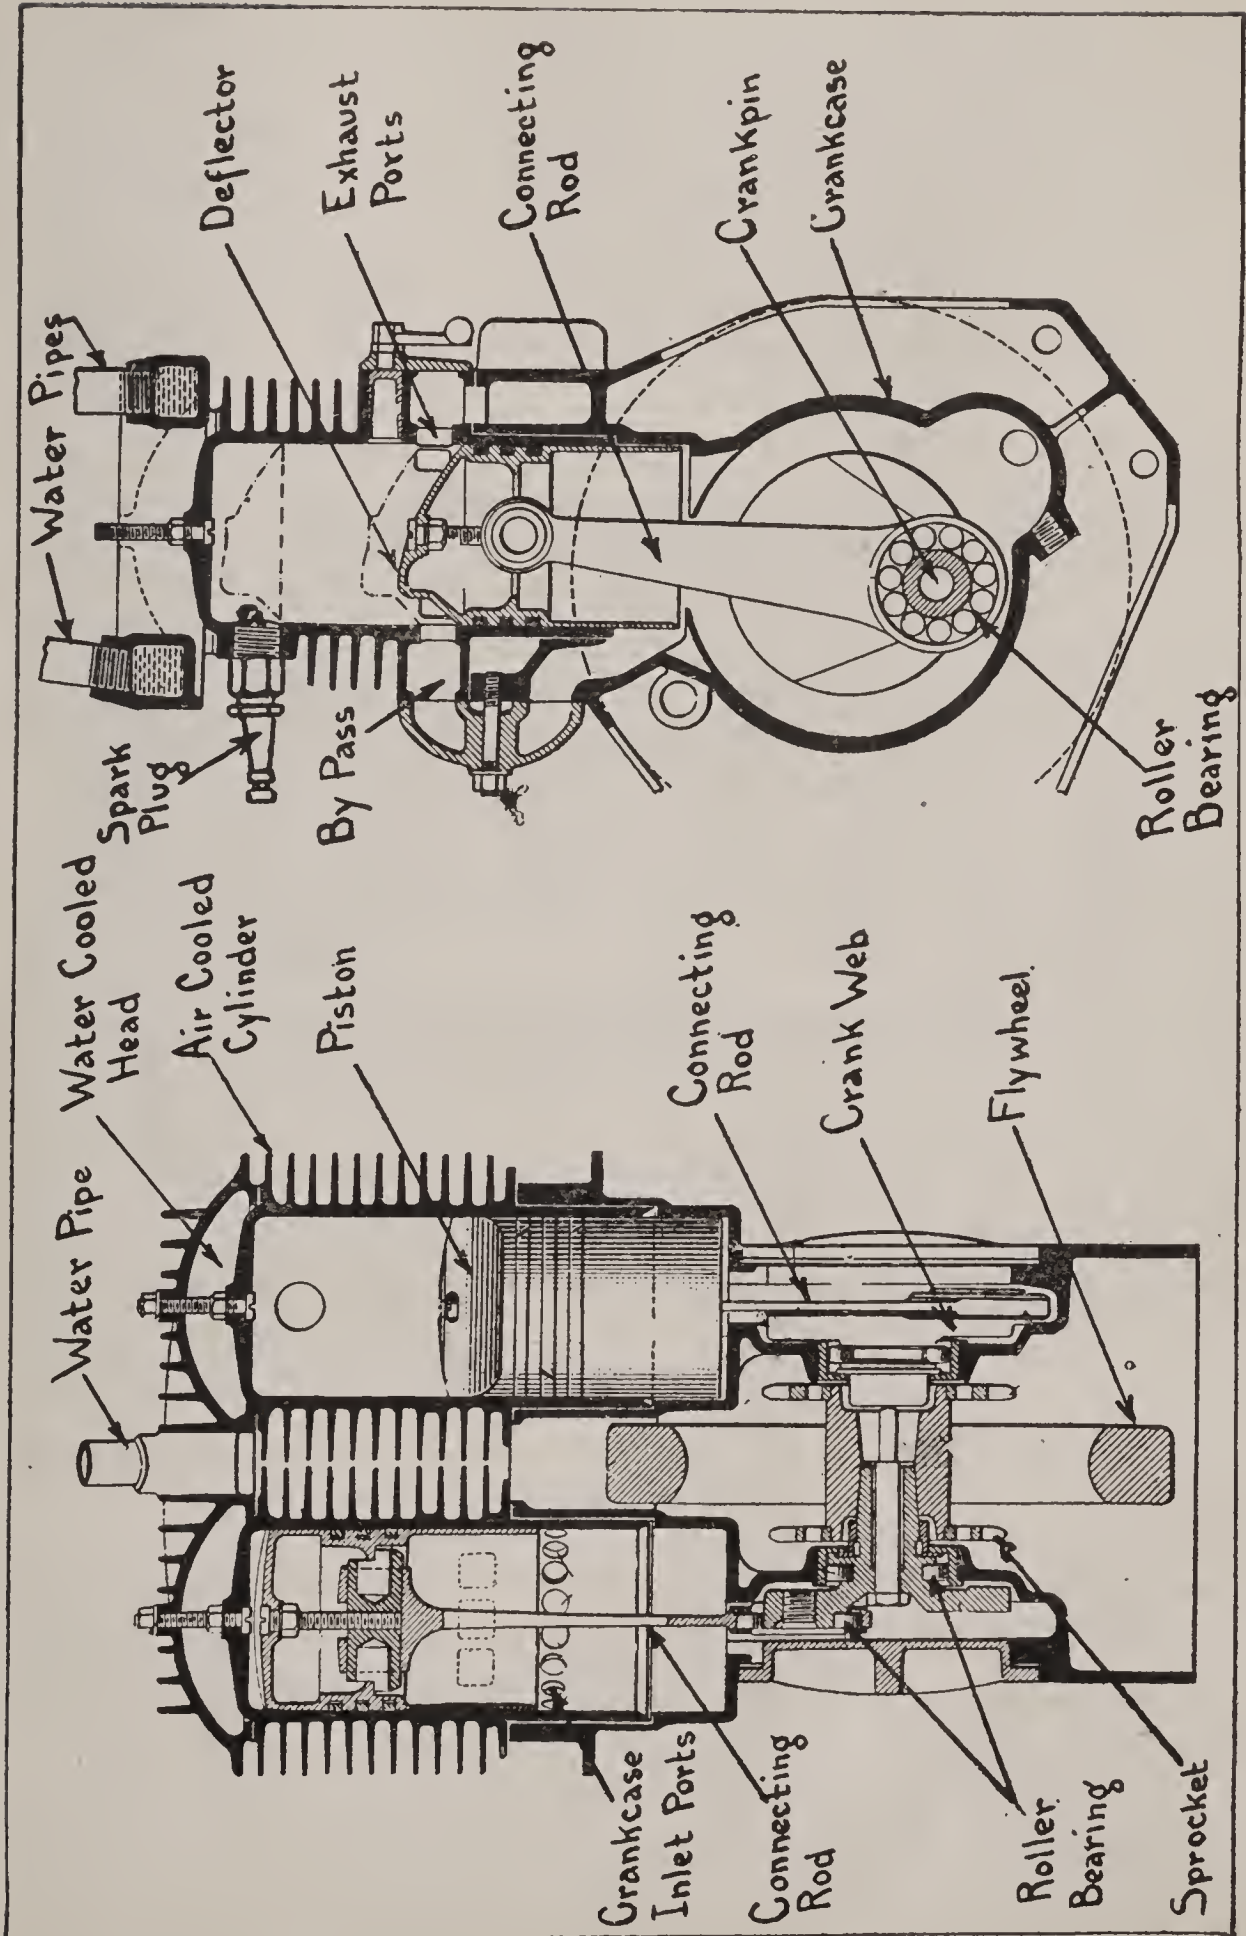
Sectional View Showing Arrangement of Parts in Scott Two-cycle Power Plant.
